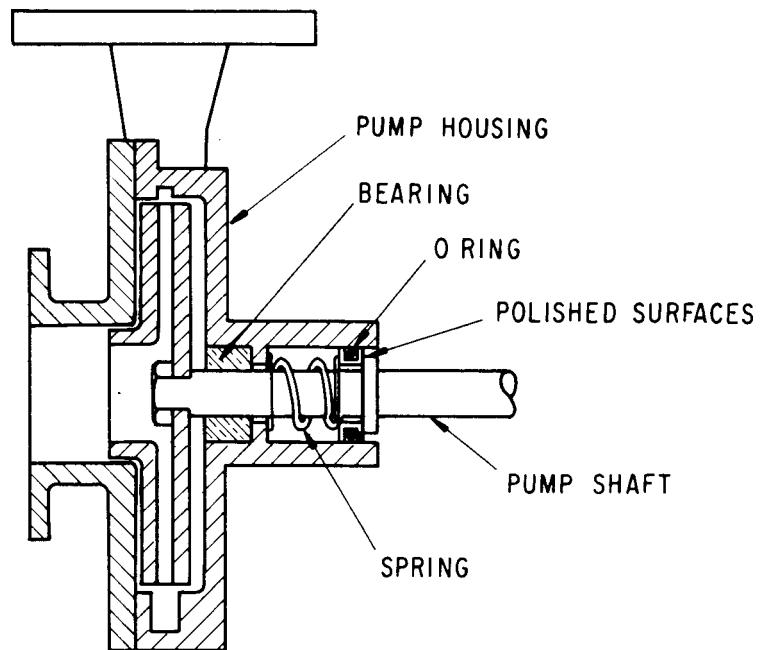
(a) Adjustable and Mechanical Pump-Shaft Seals
